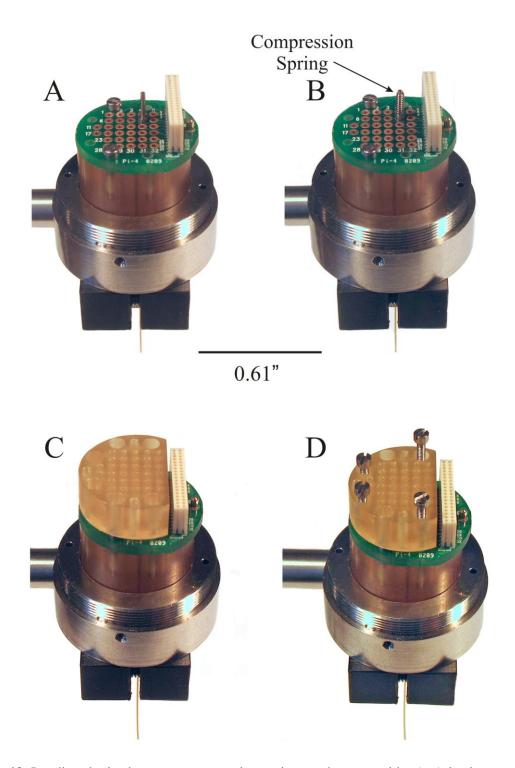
Loading the lead screws, compression springs and screw guide. A. A lead screw loaded flush against the top surface of the PCB. B. A compression spring is fitted over the top of the lead screw. C. The screw guide mounted over the lead screws and springs. D. Placement of the machine screws in the guide.
